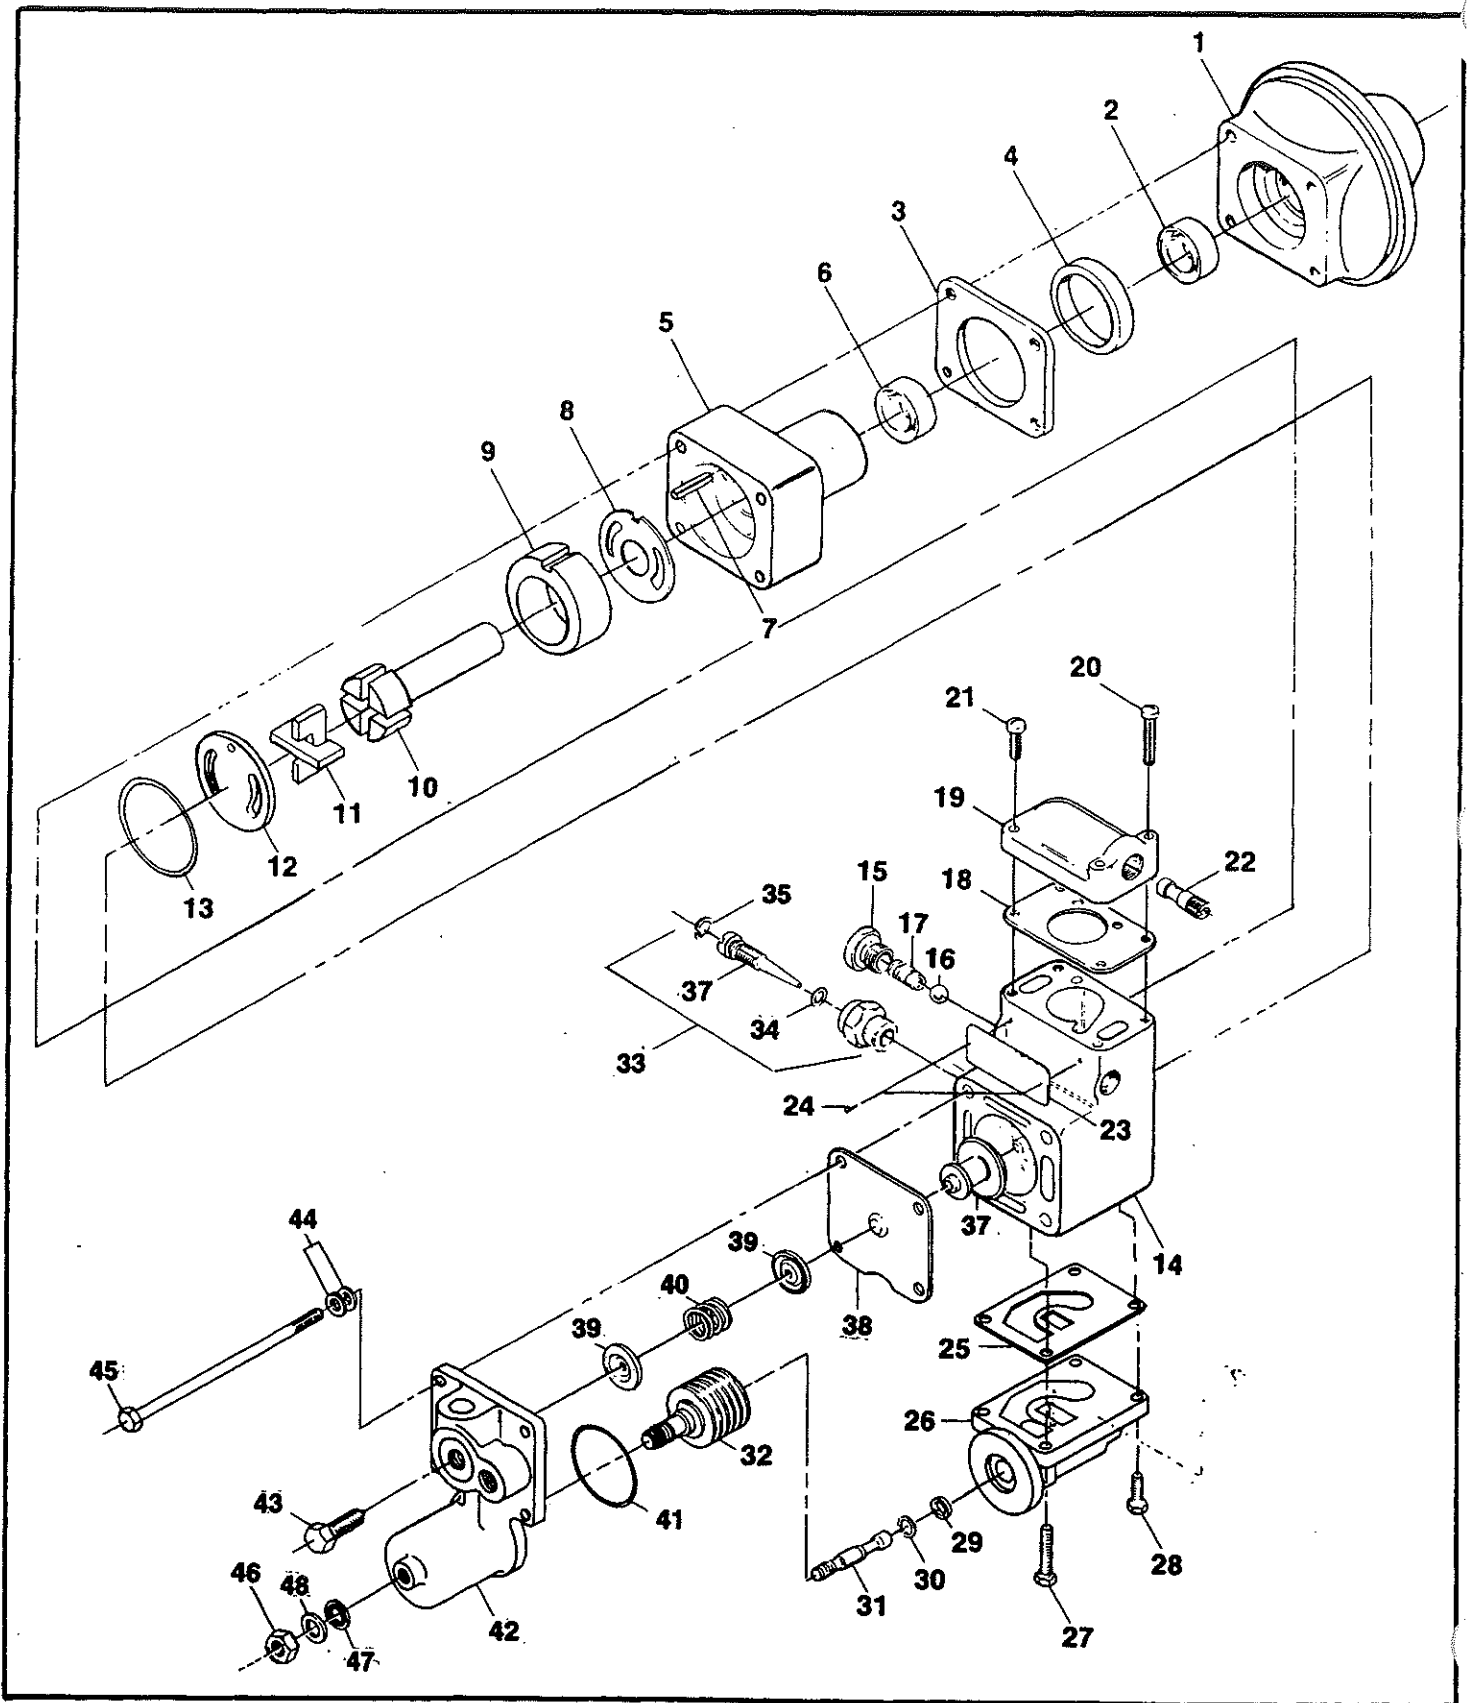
FUEL PUMP ASSEMBLY.
